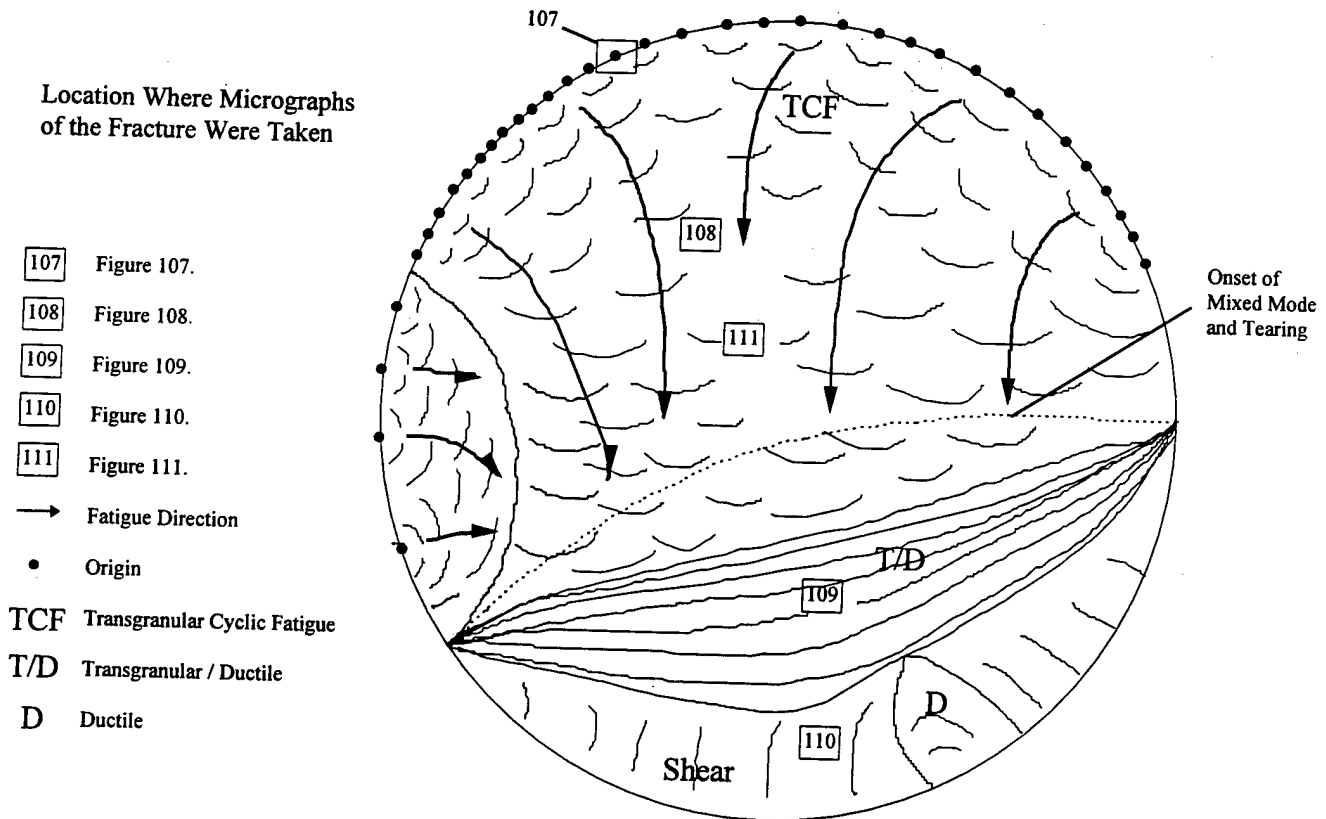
Schematic of the Fracture Surface of S&S Tie Rod -3.
